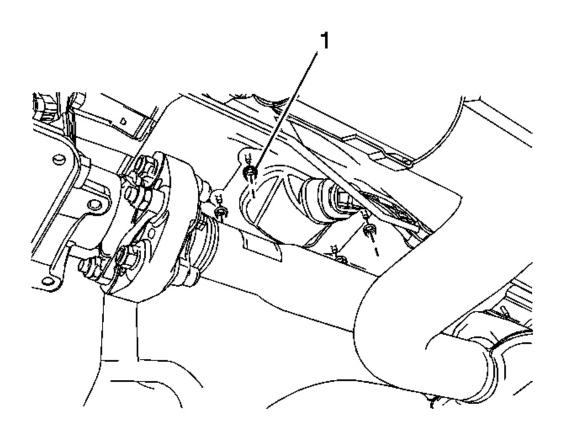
Shift Control Linkage Rod Bolt Courtesy of GENERAL MOTORS CORP.
